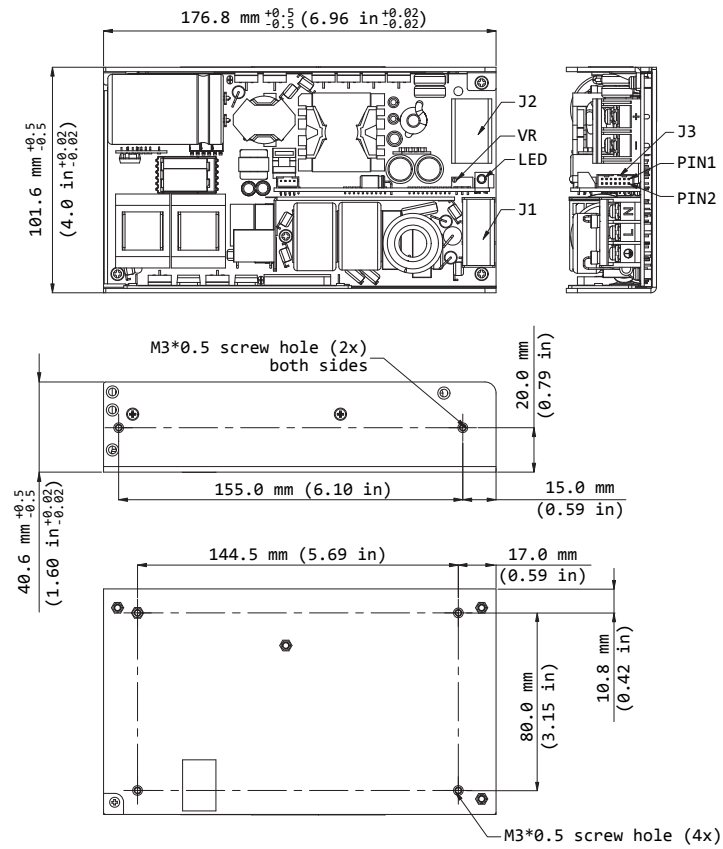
Dimensional drawing IMA-S400-xx-xxxxx
